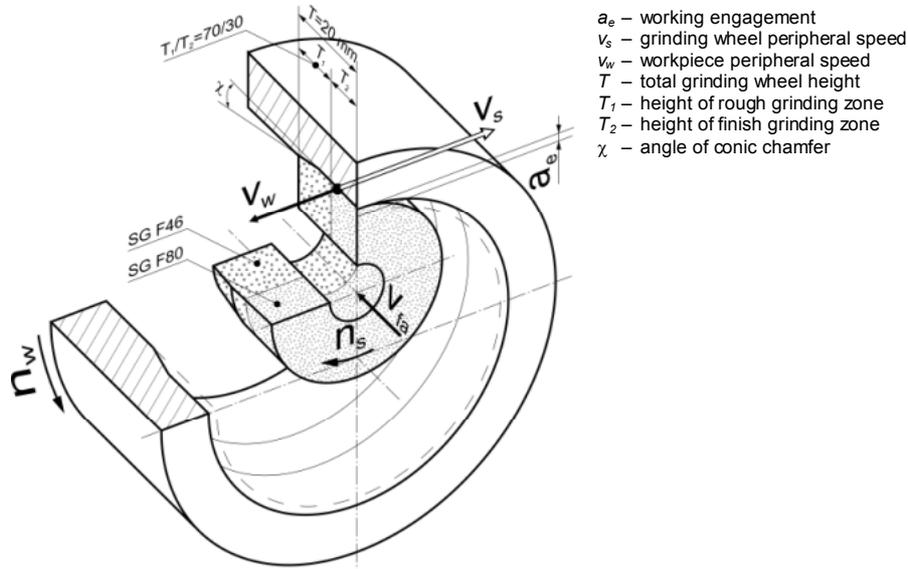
Single-pass internal cylindrical grinding using grinding wheels with zone-diversified structure [4, 7]
